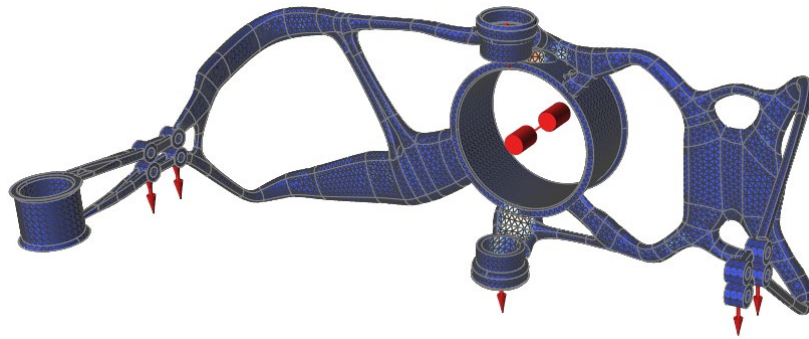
Final Topology Optimized Motor Mount Bracket
